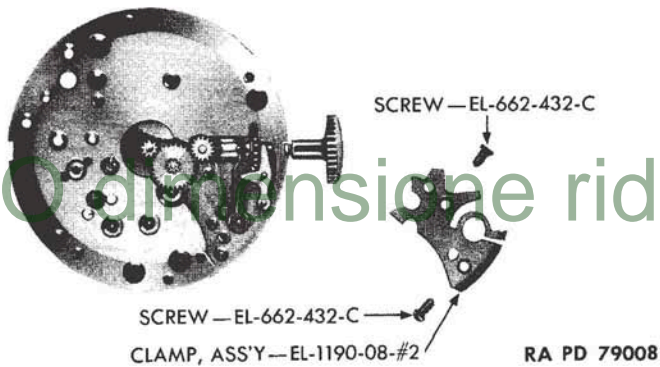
Elgin Wrist Watch — Minute Wheel Clamp Assembly Removed
